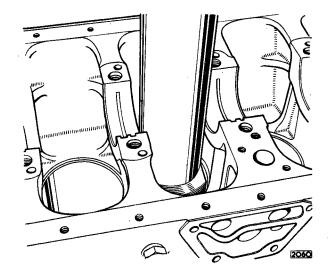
Pressing out a cylinder liner using a stepped block
